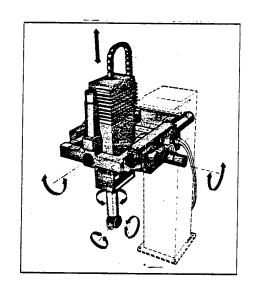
Asea's basic IRB 1000 robot with six electrically controlled shafts for movement. It is designed especially for assembly work, but can also be used in other applications, such as gluing, burring, and arc welding.
